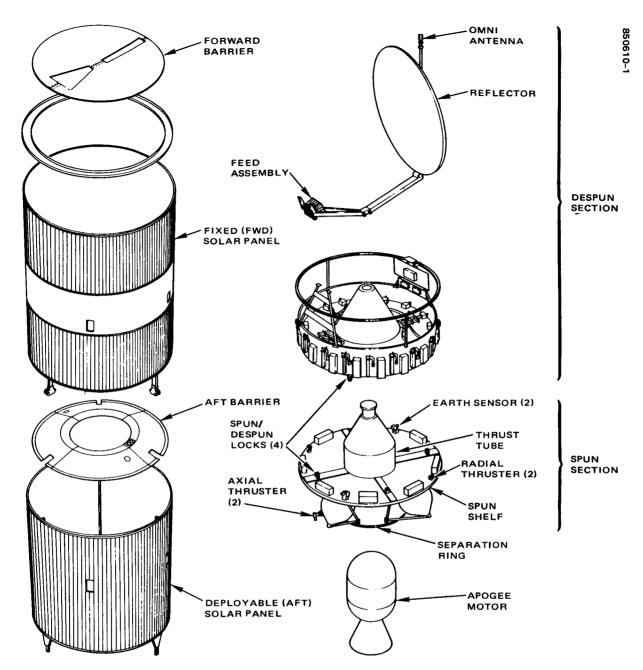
HS 376 SPACECRAFT EXPLODED VIEW
